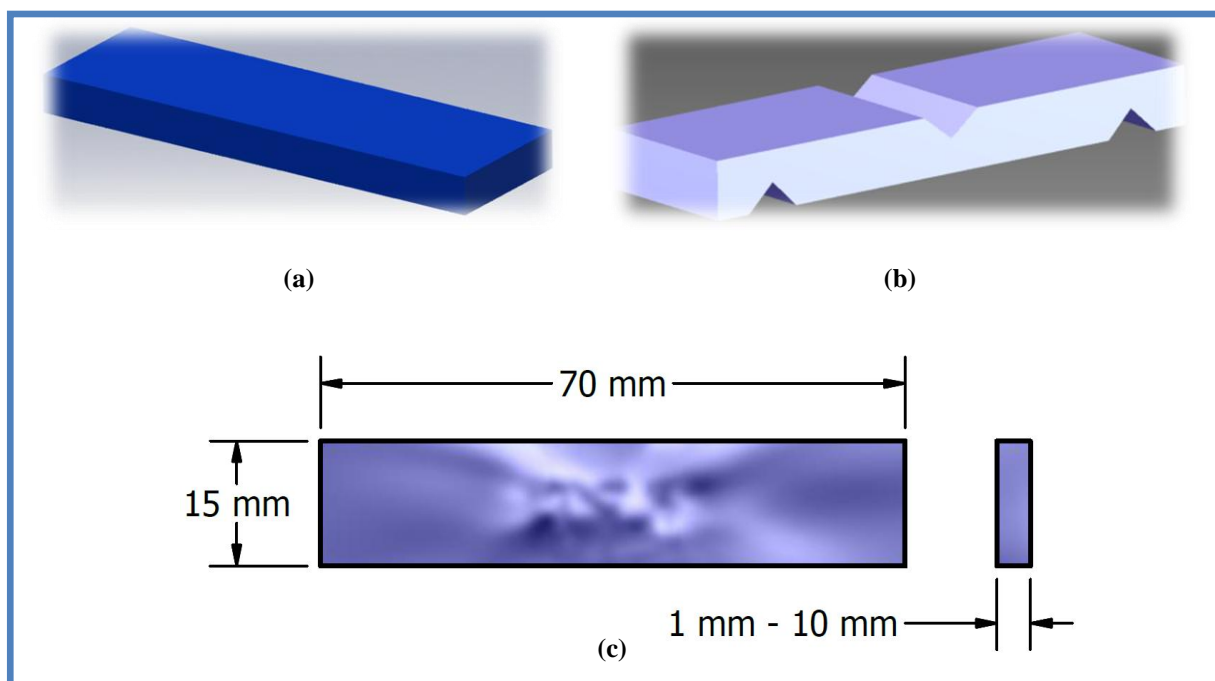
Testing Specimen (a), Aligning Tool (b) and Testing Specimen with Dimensions (c)
